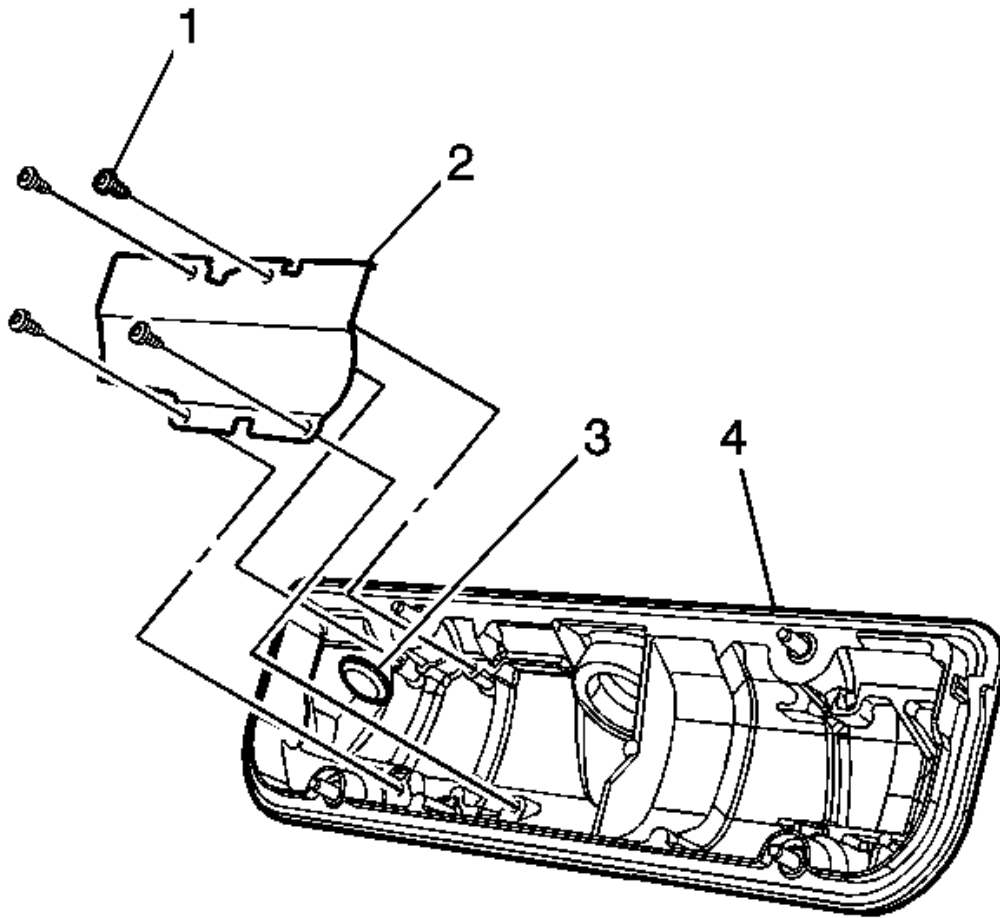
View Of PCV Baffle, Screws, PCV Valve & Valve Cover
